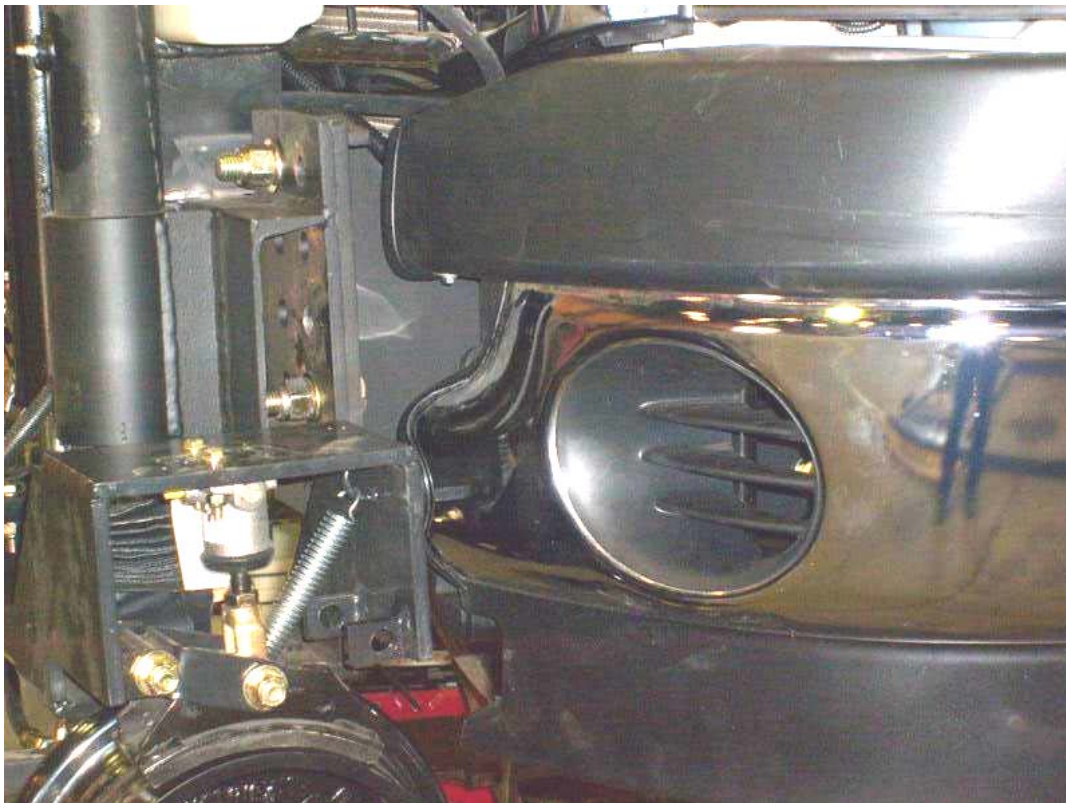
Modified Bumper Part 2- Installed (Drivers Side Corner) (2017 Model)
